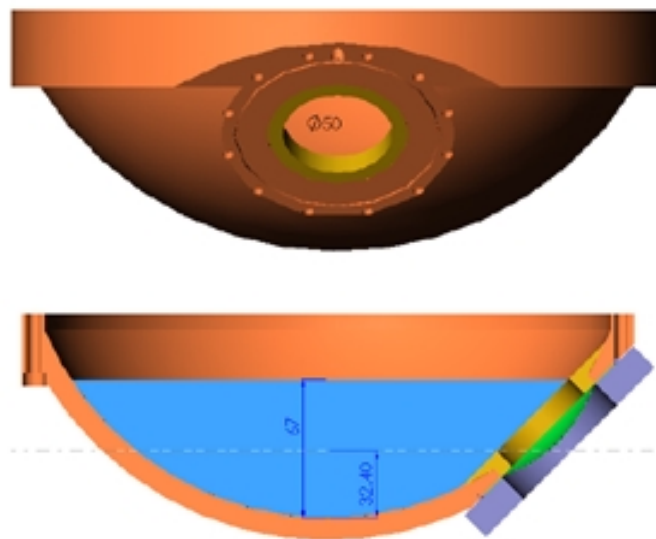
Lower head with lateral hole with 50 mm diameter
